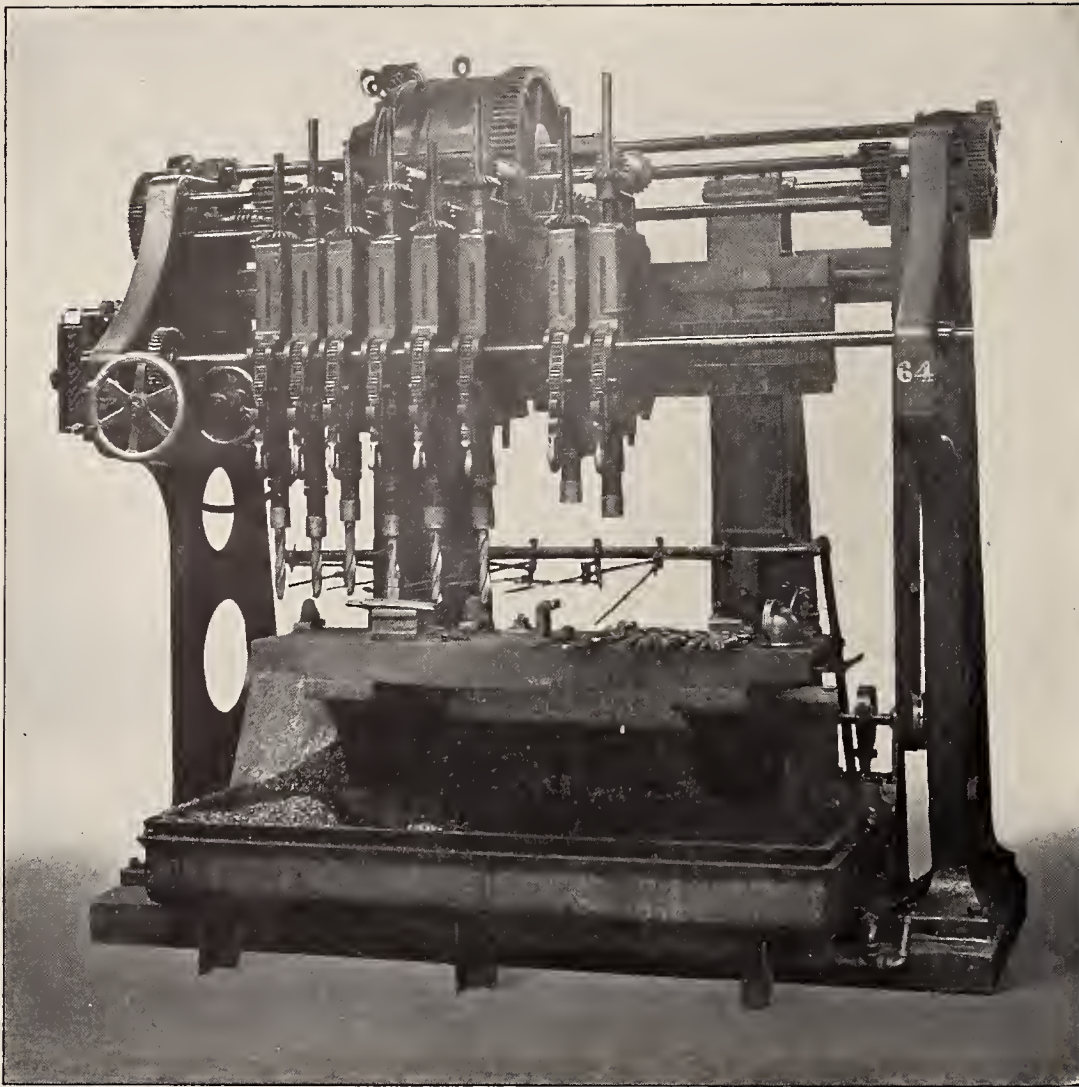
A MULTIPLE-SPINDLE DRILL PRESS OPERATED BY A BULLOCK MOTOR MOUNTED ON A BRACKET ATTACHED TO THE HOUSINGS
